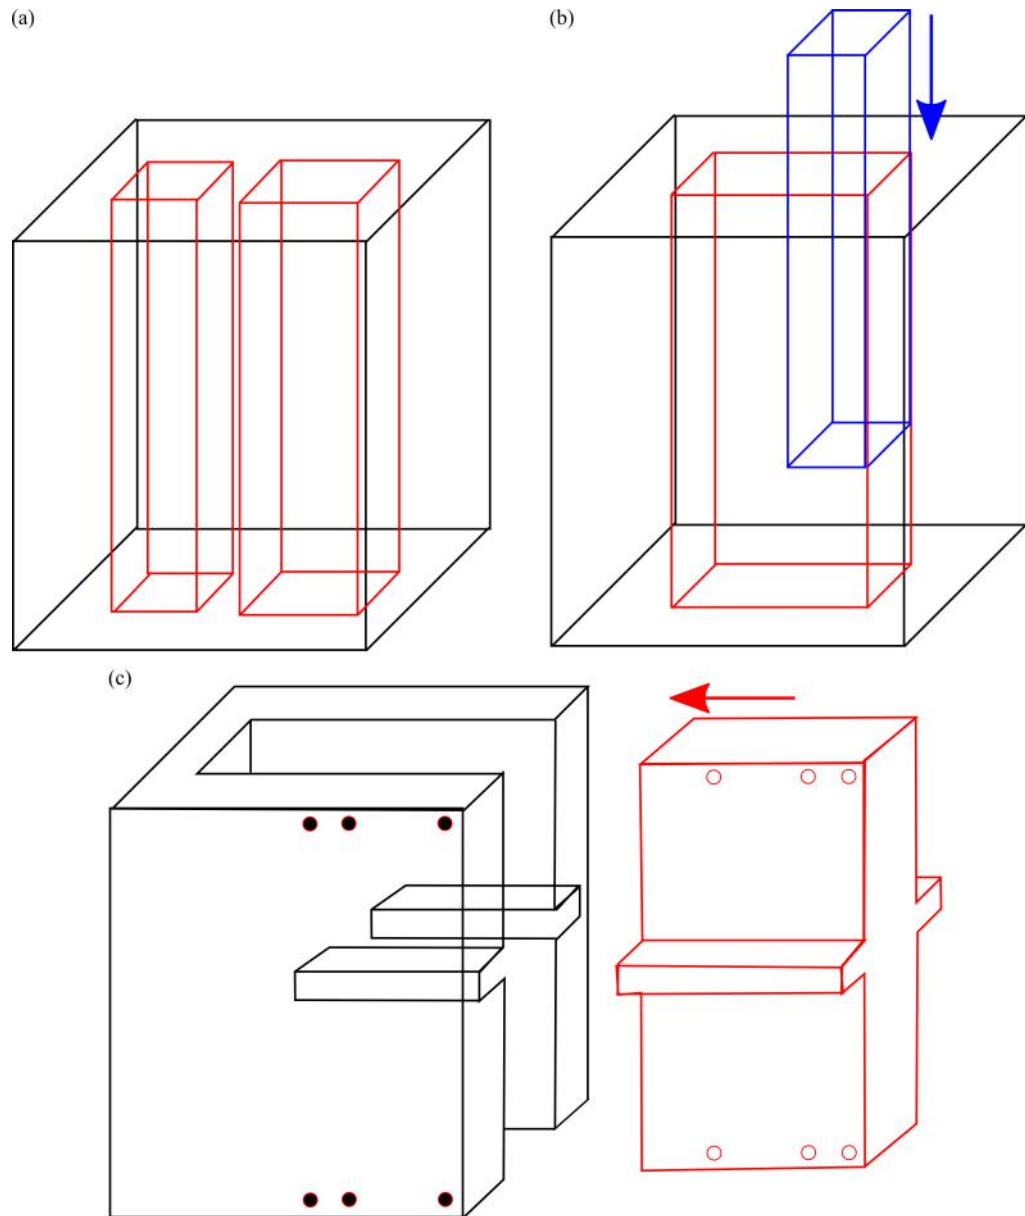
Mould re-design suggestions: (a) new mould with two holes of varying surface; (b) modifying old mould by adding a metal filler; and (c) new mould with varying surface.
